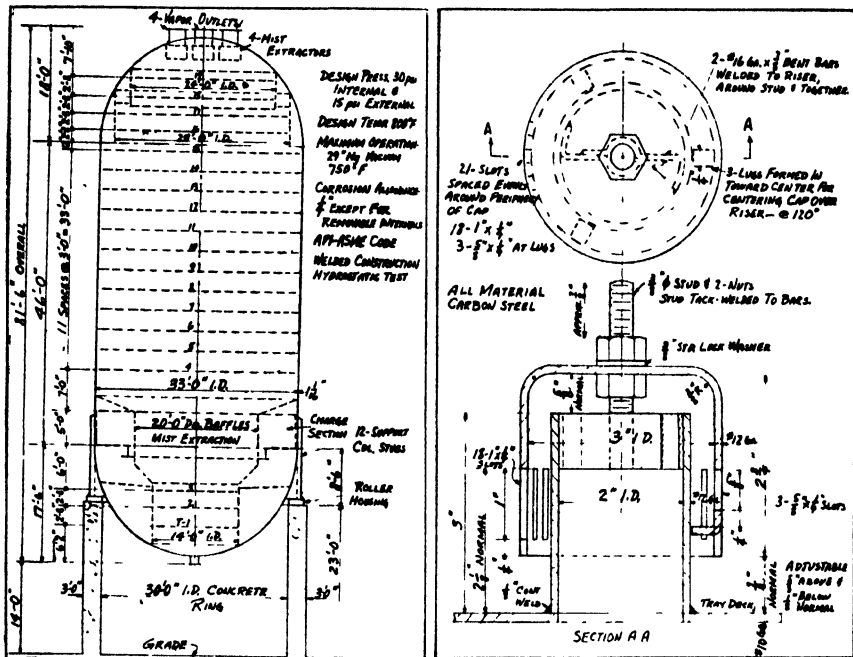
, (left). Vacuum fractionating tower arrangement drawing.
